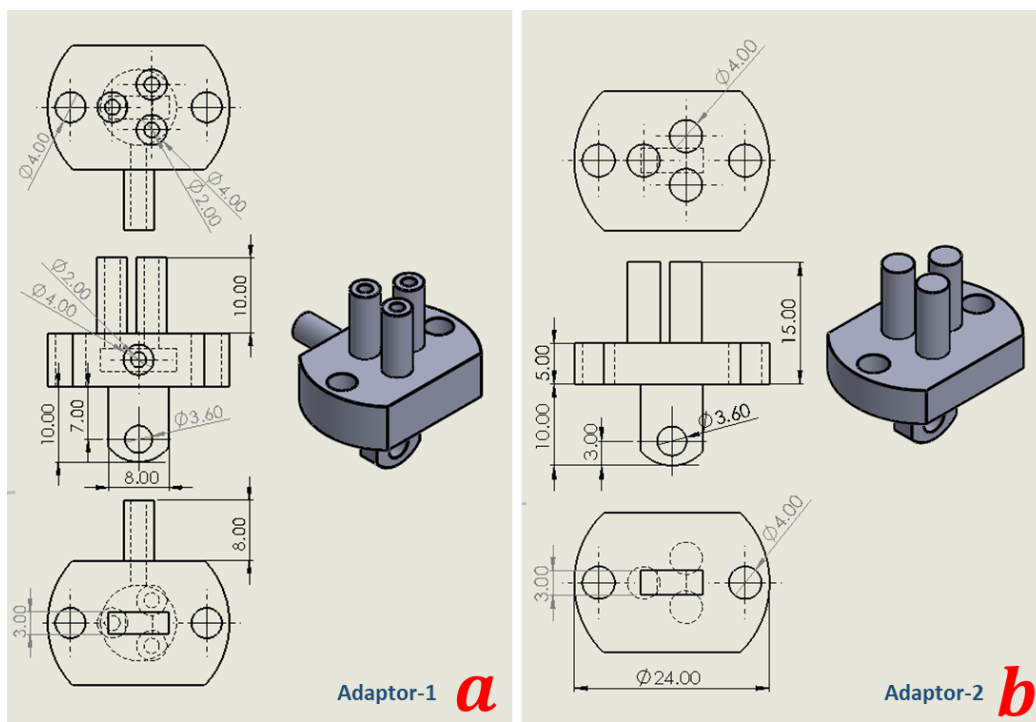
a) Detailed drawing of Adaptor-1 located in the upper arm, and b) Detailed drawing of Adaptor-2 located in the lower arm.
